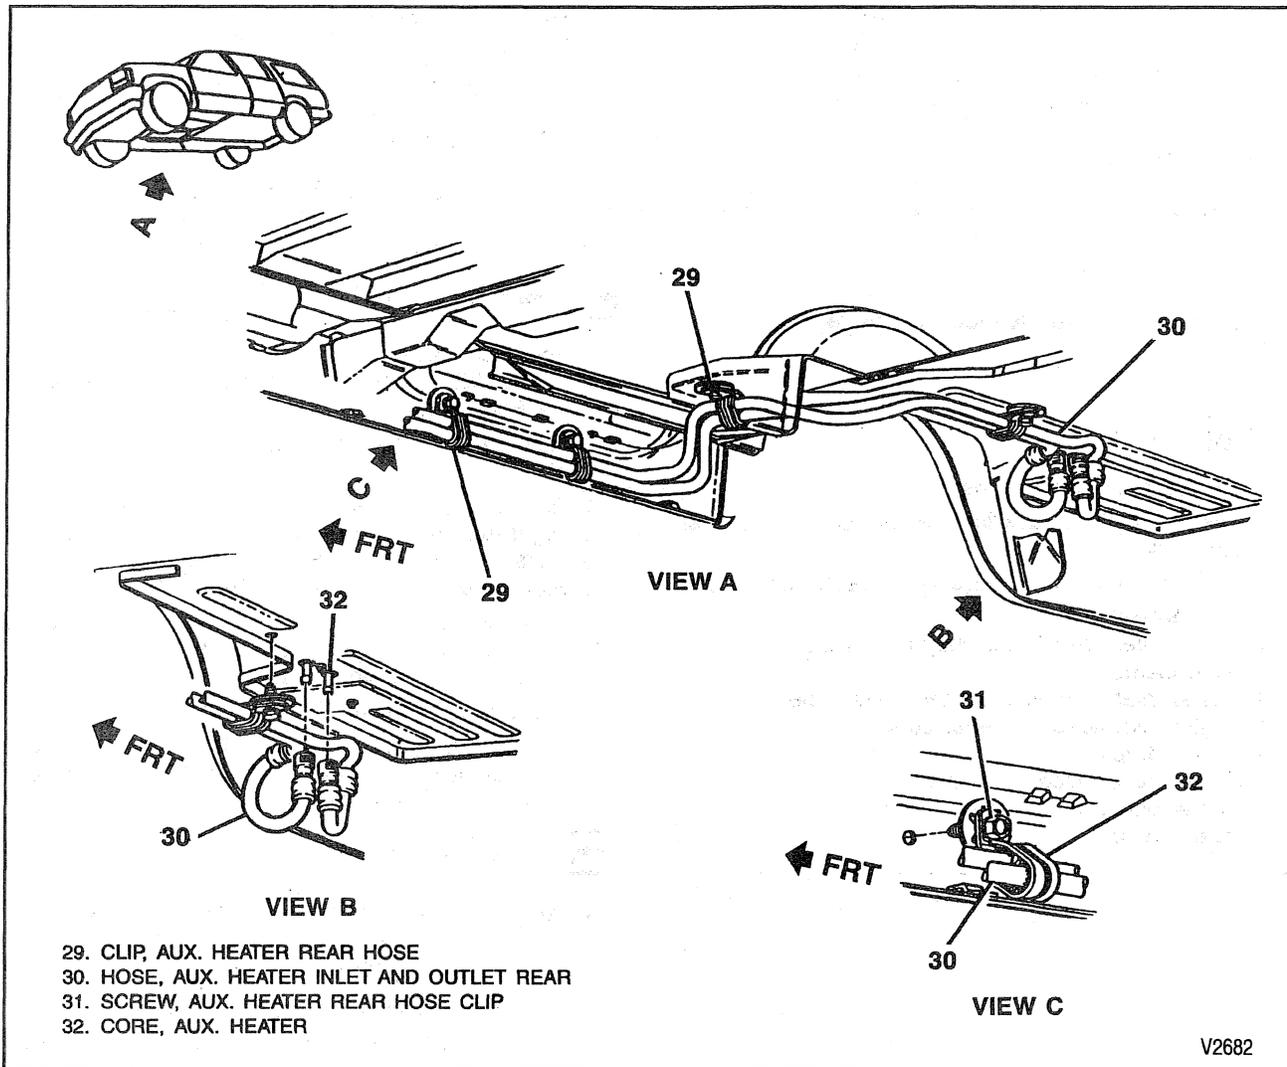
Auxiliary Heater Hose Assembly Routing (Rear)
